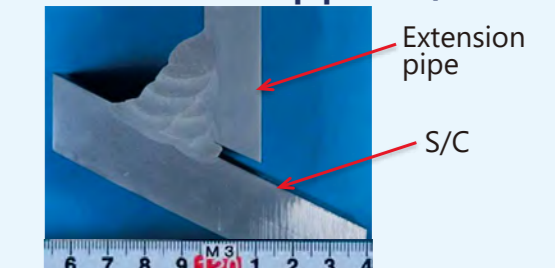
Macroscopic cross-section view of welding joint (three layers eight passes)
